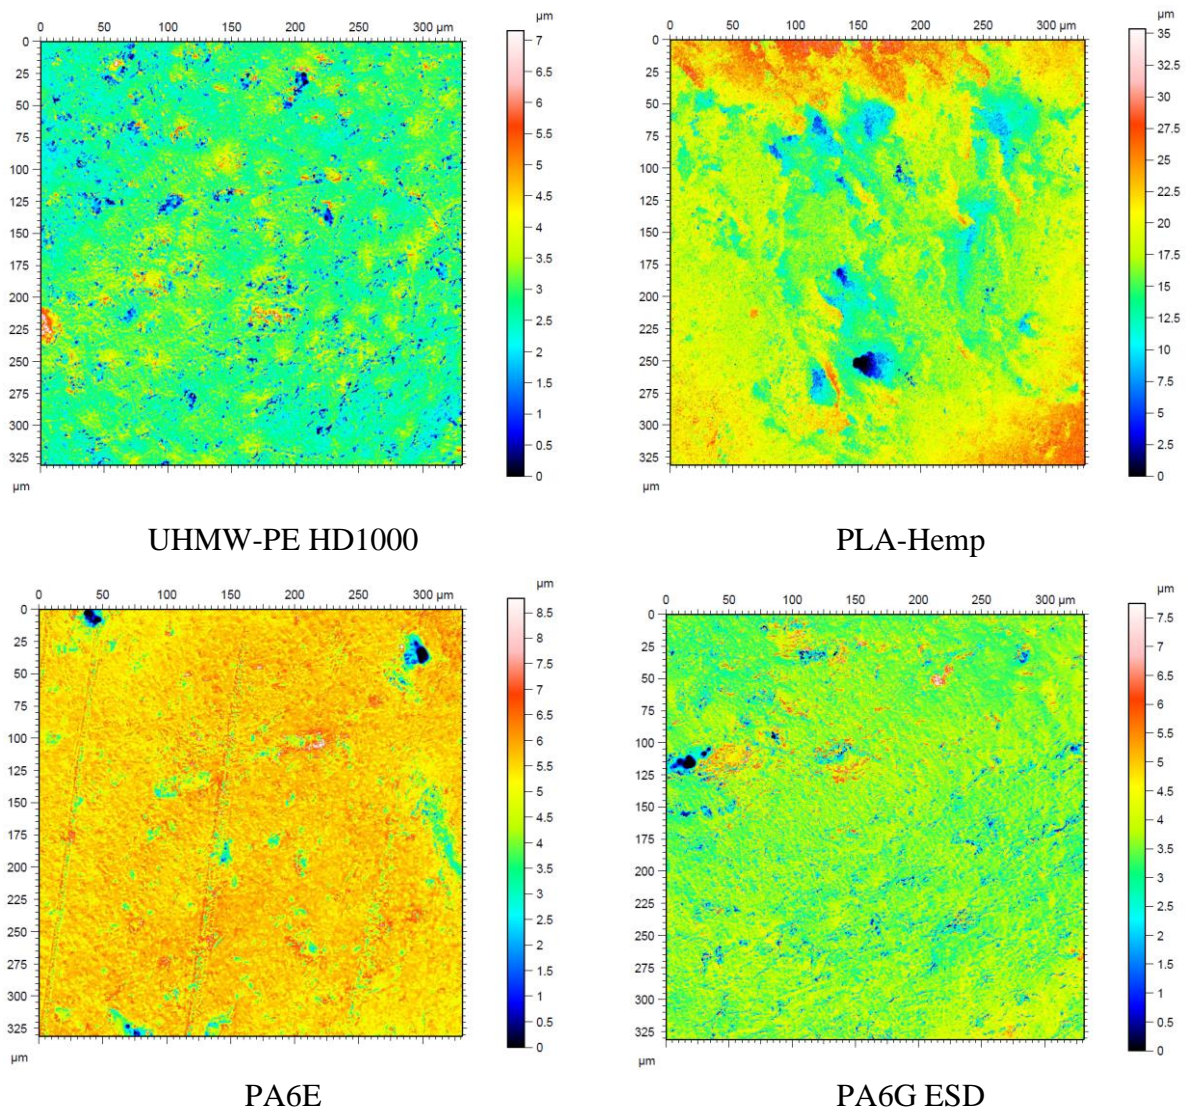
The tested polymer surfaces before measurements: PLA-HF is pressed, while the others are machined surfaces
